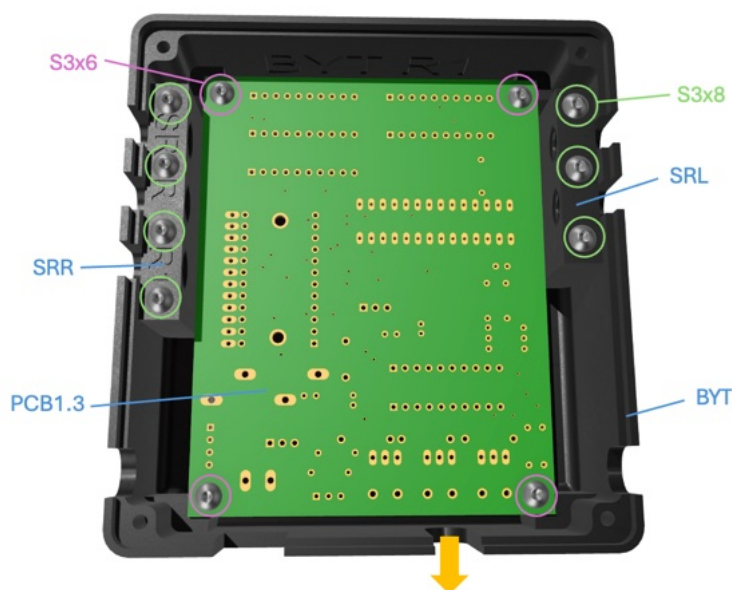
Main circuit board V3.0 housing “free-standing” assembly step 1.
